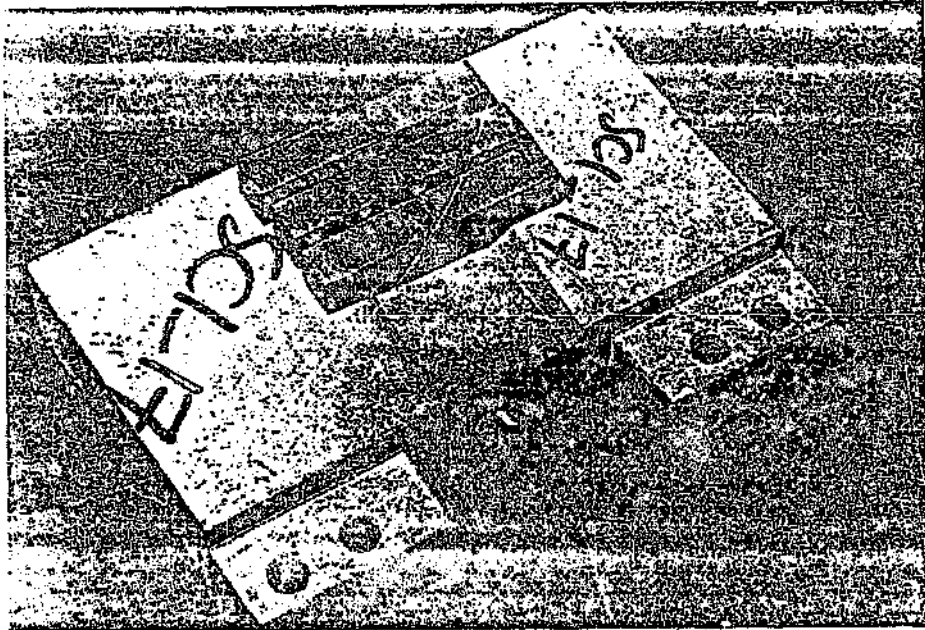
Deformed plane strain compression specimen showing the positions from where tensile and Charpy specimens were machined.
